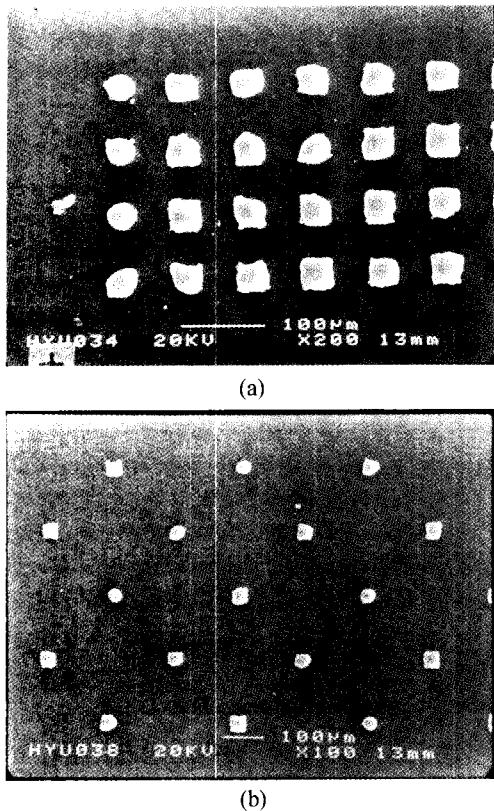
The SEM images of solder bumps reflowed at 150°C. (a) Ag/In solder bumps with 80 μm pitch. (b) Ag/In solder bumps with 300 μm pitch.
